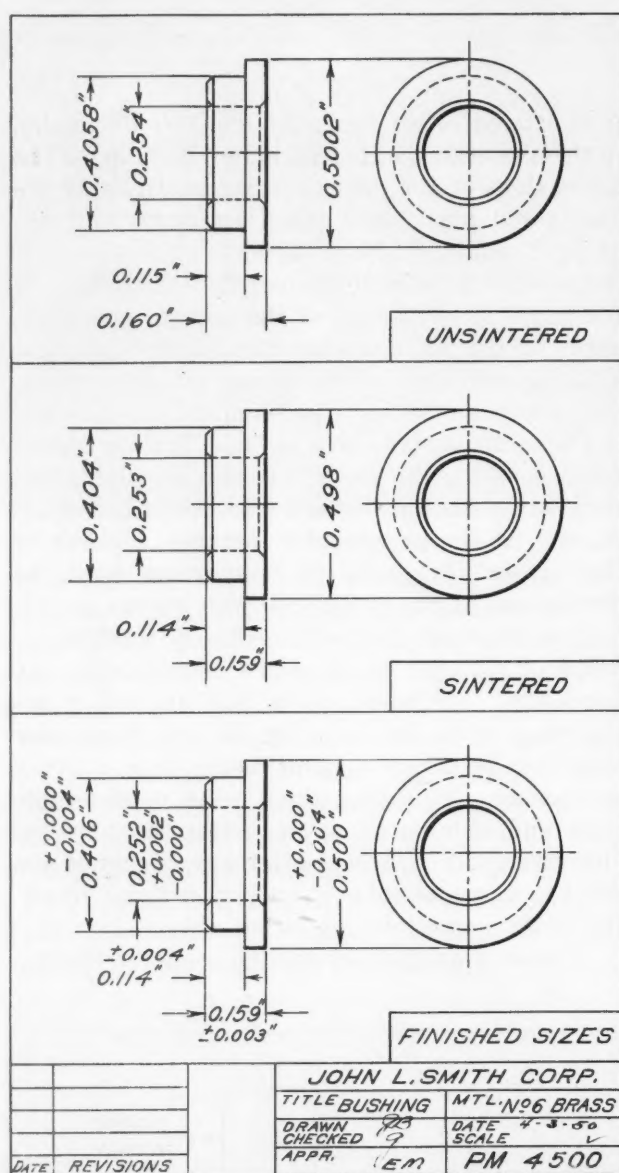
Typical specification drawing, showing the dimensions of a powdered-metal part in three stages of manufacture
